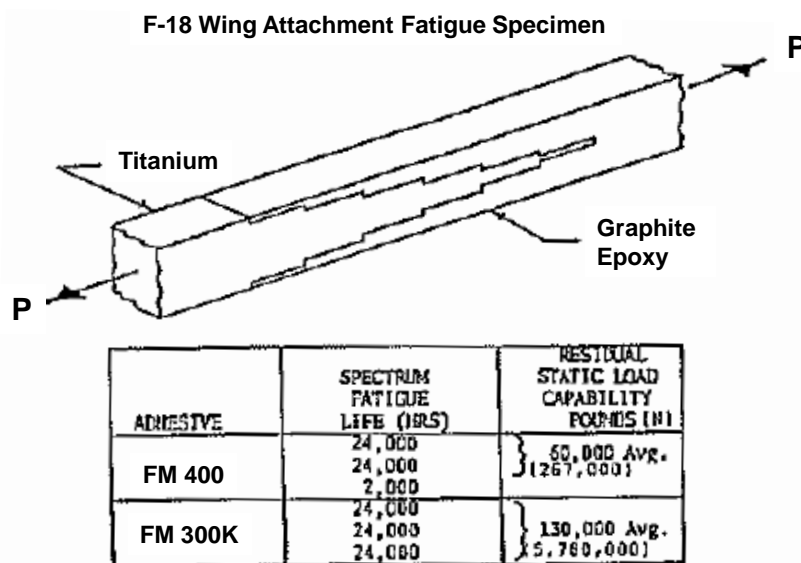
F-18 Wing Attachment Fatigue Test Specimen (Reference 12-55).
